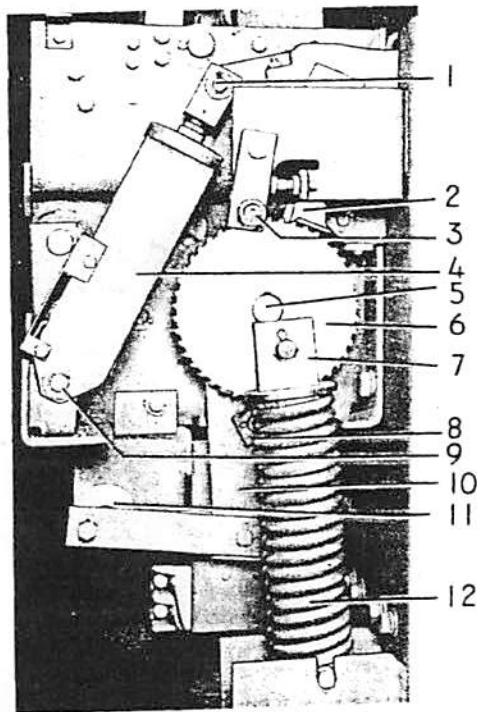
(8034463) Right Side View ML-13 Operating Mechanism
